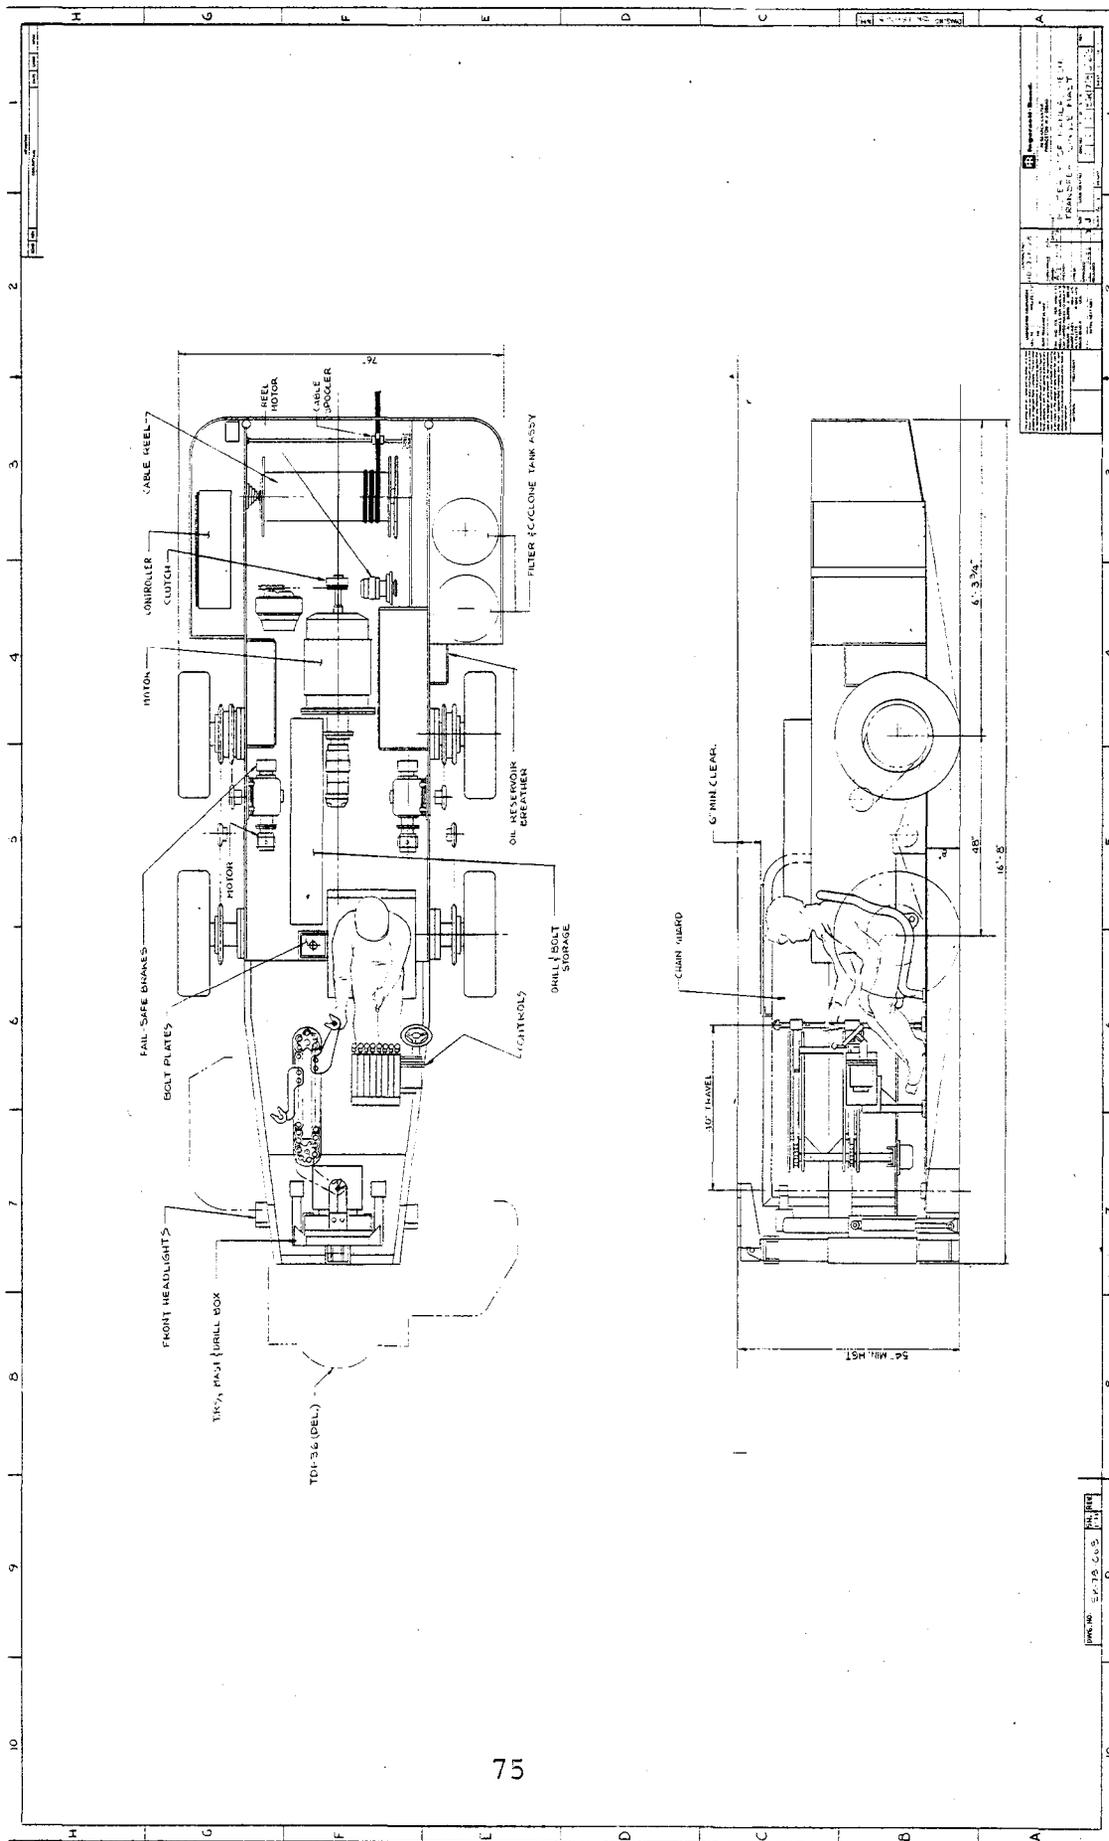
Plan and Elevation Views of the Transfer Bolter - Single Boom (New Chassis)
